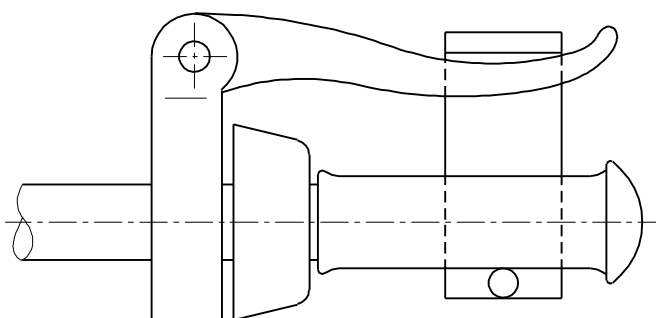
Method of fitting the gauge to the handbrake-lever and handlebar (minimum grip length is shown)
